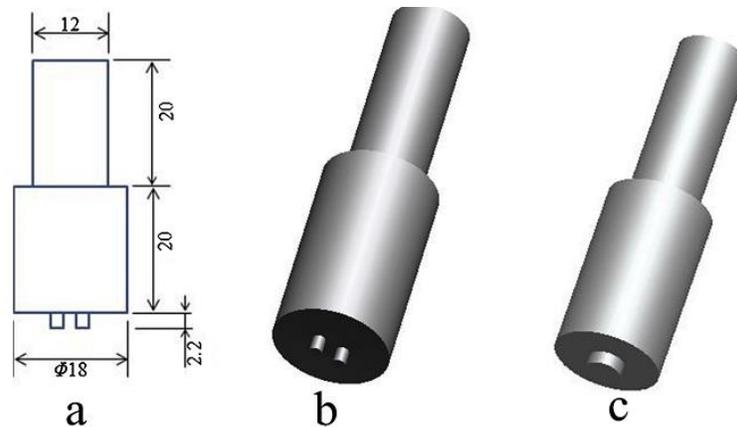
Geometry and dimension of applied tools: (a –b) dual-pin tool, (c) single-pin tool [9].
